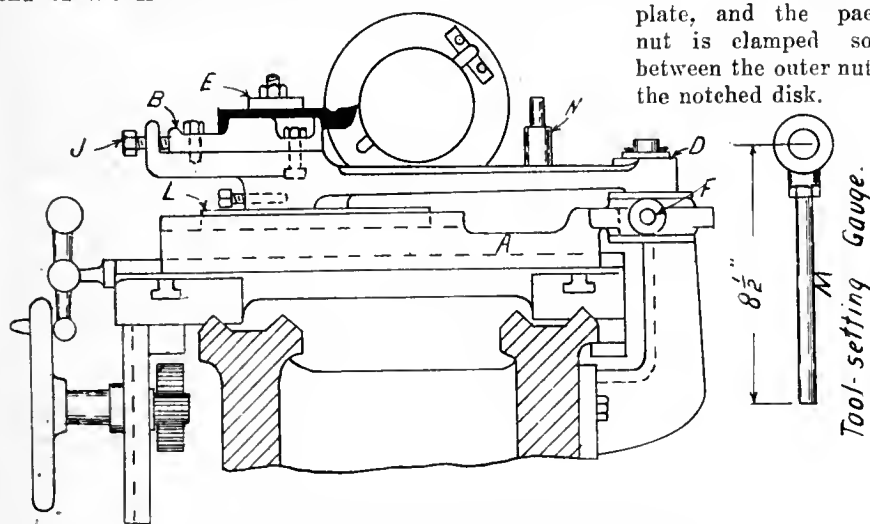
END VIEW OF RADIUS TURNING DEVICE.
